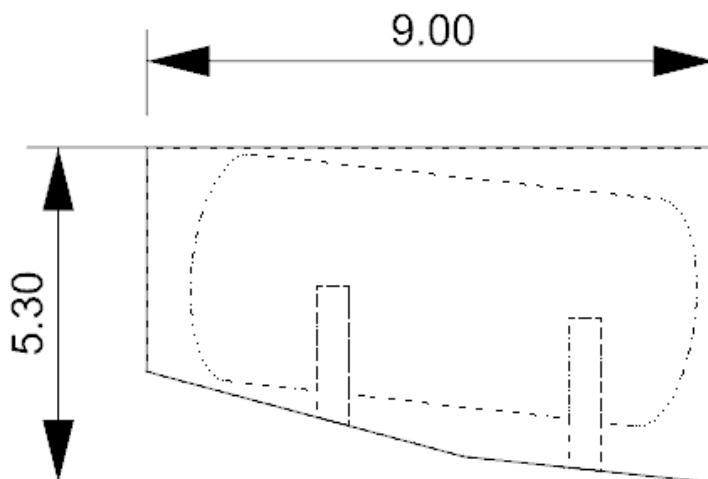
Side view of MAN cryo tank inside recoil tanks.
